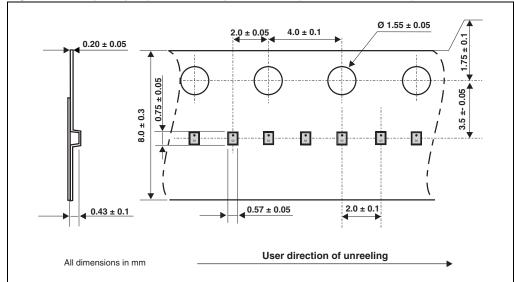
Flip Chip tape and reel specification (dimensions in mm)
